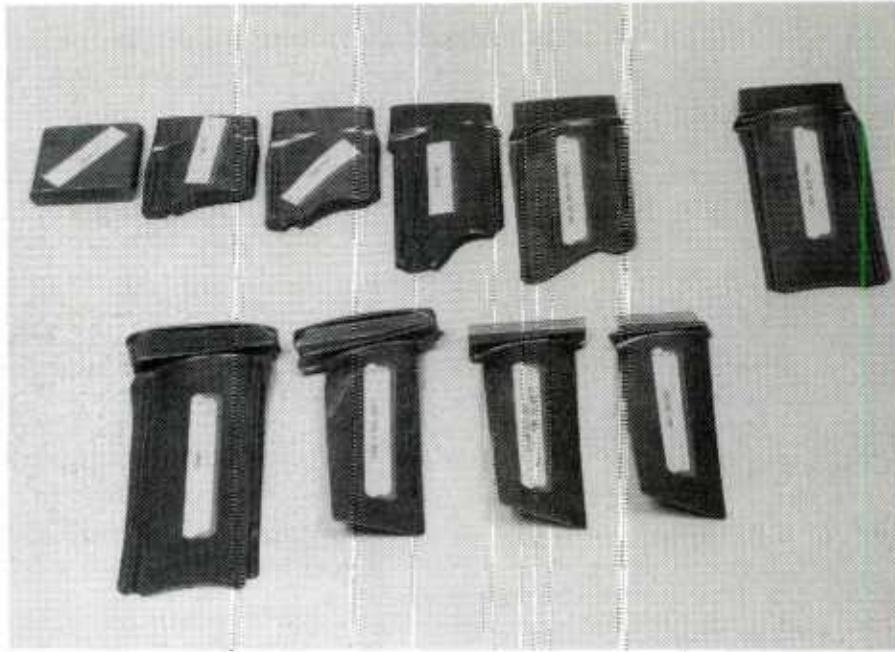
Some Stages in Cold Roll-Forging of Compressor Blades in 17-4PH Steel (#76-2679)
